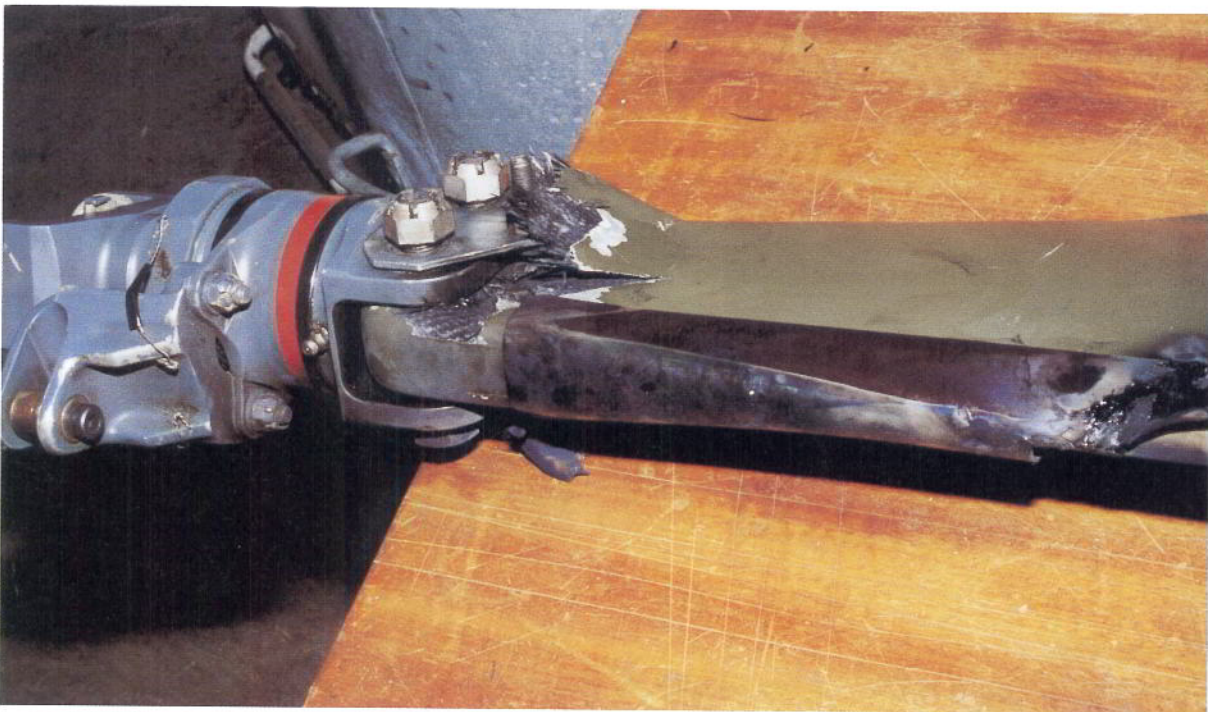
D: Showing very marked carbon fibre disbonding and delamination adjacent attachment bolts on inboard side of above blade.
